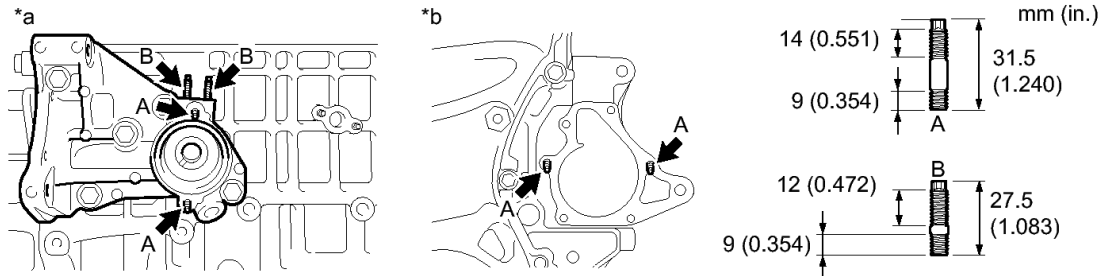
Identifying Inlet Water Housing Bolts Tightening Sequence
